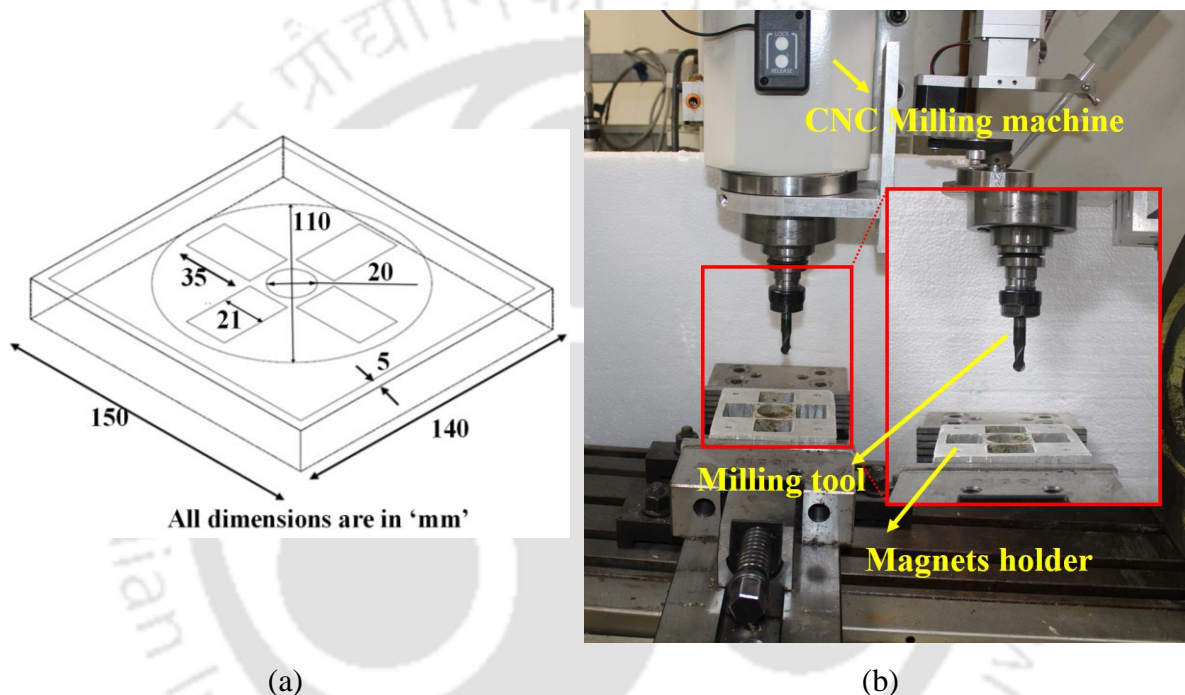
(a) Magnets arrangement in an aluminum fixture and (b) CNC milling machine
